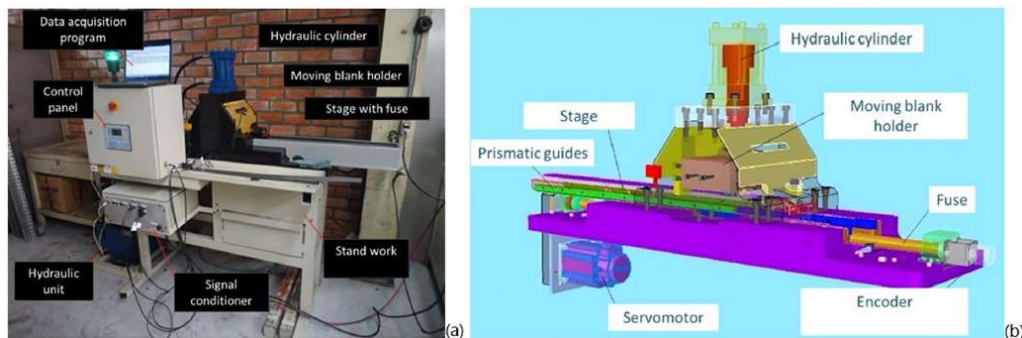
Strip drawing test rig: (a) general view; (b) scheme.
